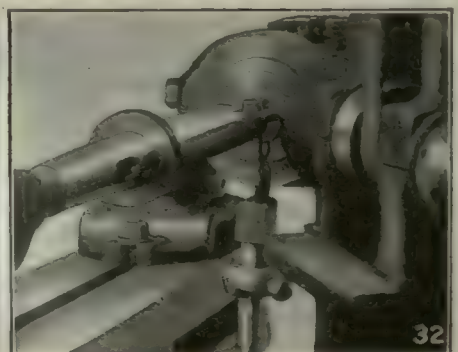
GRINDING CLEARANCE ON BORING TOOL
